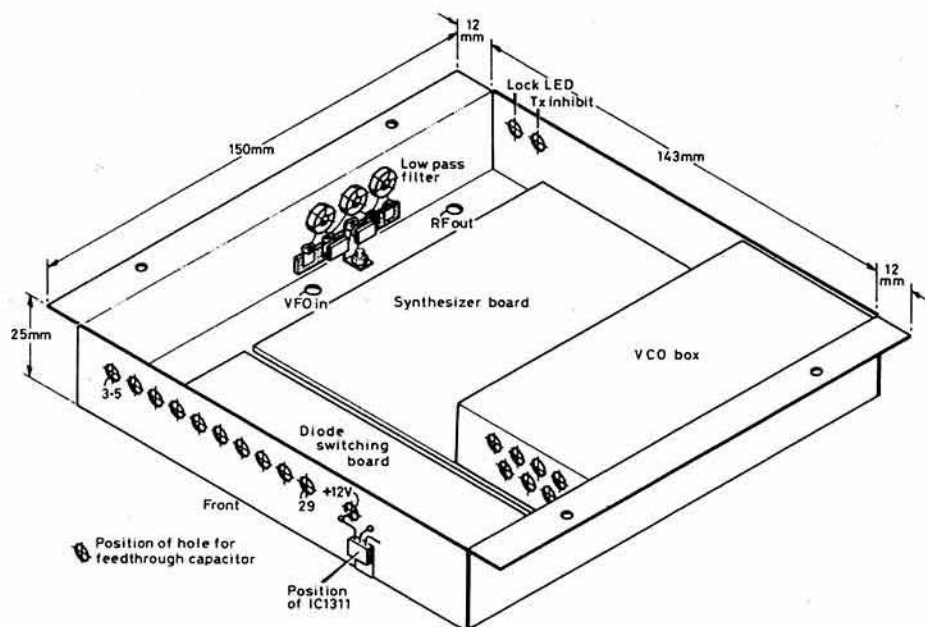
Details of synthesizer box made from tinfoil. Dimensions in millimetres
